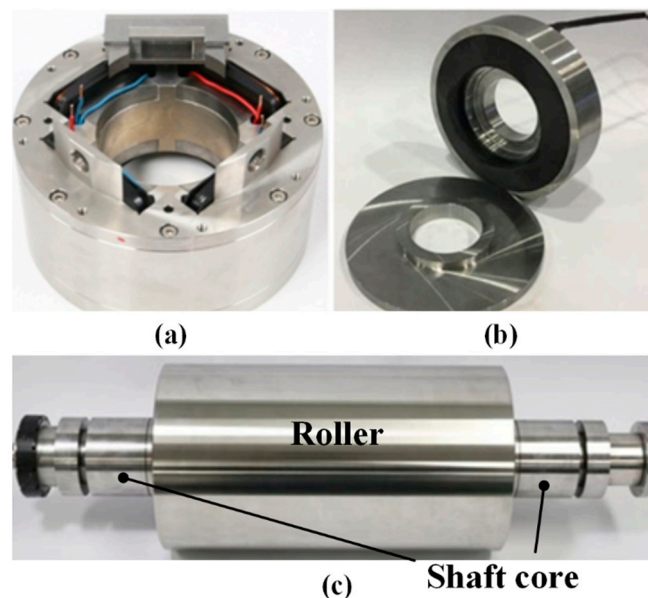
Fabricated roller and magnetic bearings for automatic alignment function: (a) radial magnetic bearing; (b) thrust magnetic bearing; and (c) precision roller.
